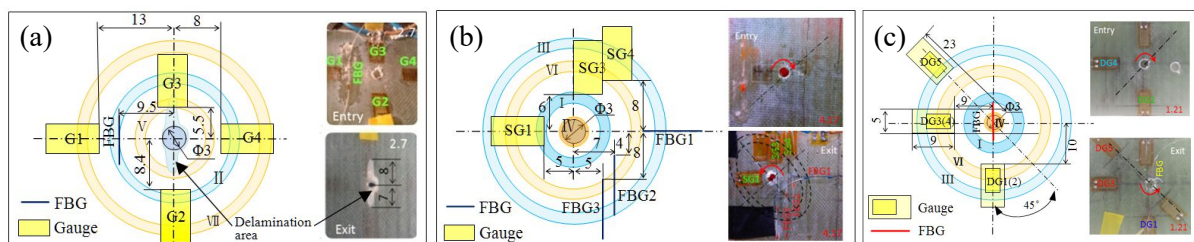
(a) Sensors on entry side (the first hole), (b) and sensors on exit side (the second hole) , (c) and sensors on both sides (the third hole) during drilling and photos of drilled holes.
